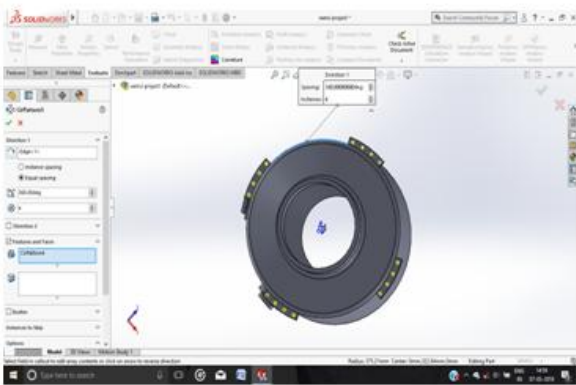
shows extrude cut for combustion chamber outer case bolting locations
